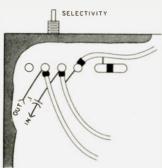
Bottom view of 80356 audio preamp board. Cut foil as indicated by heavy black areas. Add jumpers as indicated by heavy black lines. In/out indicates wiring to added filter.
